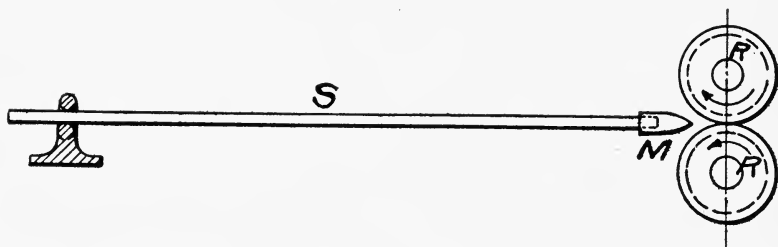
Rolls and Mandrel for Making Lap-Welded Pipe.
